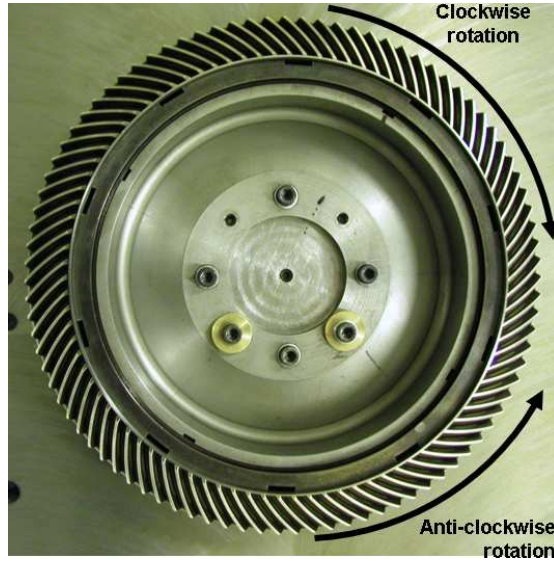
The spiral bevel gear, illustrating rotation directions
